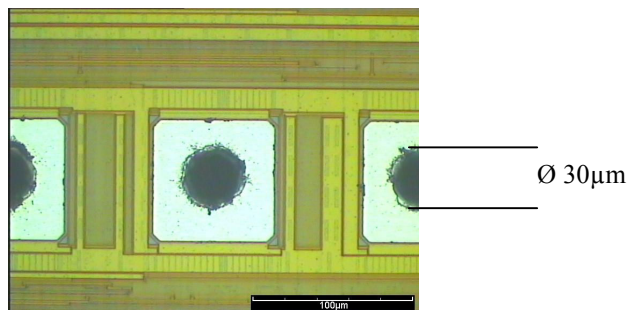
Holes drilled in metallic contact pads, 25 µm nozzle, 26W, 50 kHz, 30 holes/s
